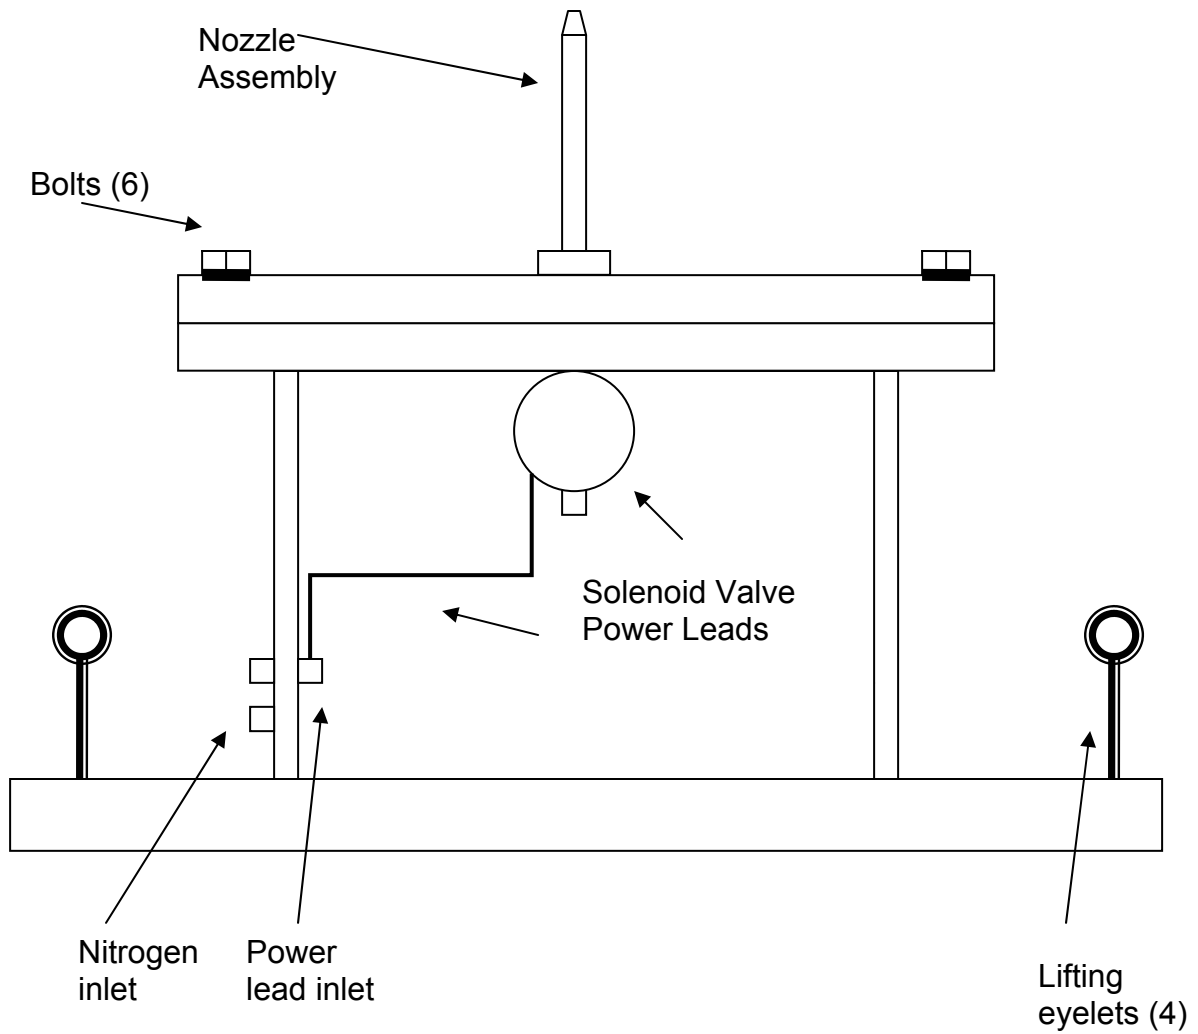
Diagram showing a side cutaway view of the underwater toroidal bubble generator for use in the anechoic tank. (Not to scale)
